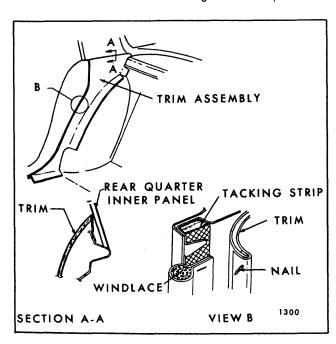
Rear Quarter Lower Trim Assembly - "B&C"
